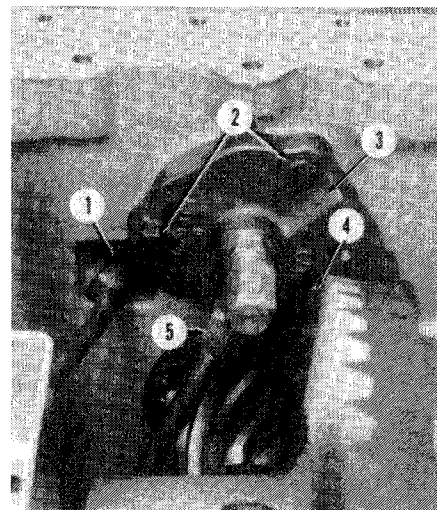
View showing location of C3 oil pipe (5) and reduction shaft bearing retainer (3).
